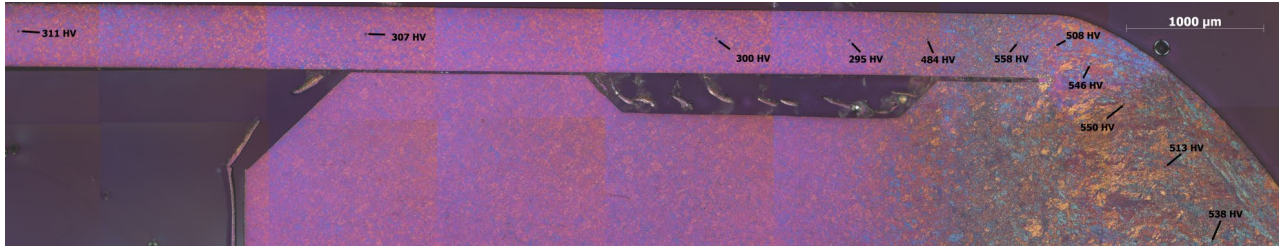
Mosaic of HAZ with hardness measurements of top end weld.
